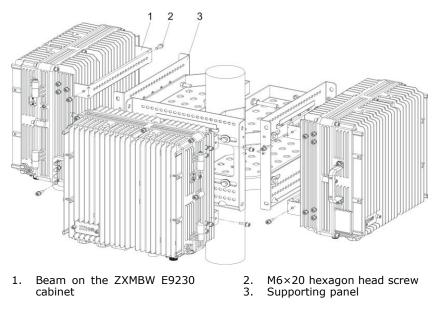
MOUNTING TWO ZXMBW E9230 CABINETS
